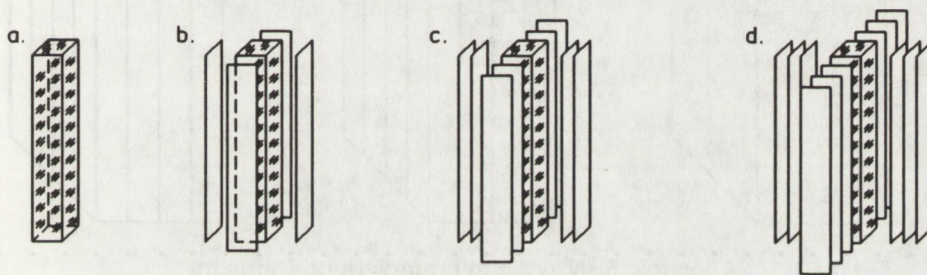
Necessary components for specialty optical fiber preform assembly
